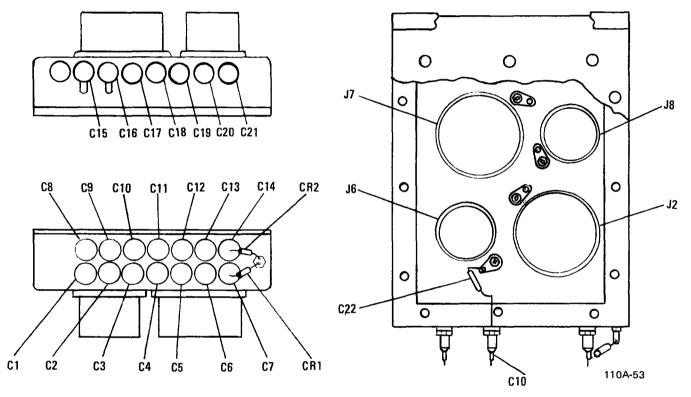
Case Assembly 1A2, Part No. 0082-2000, Component Locations
